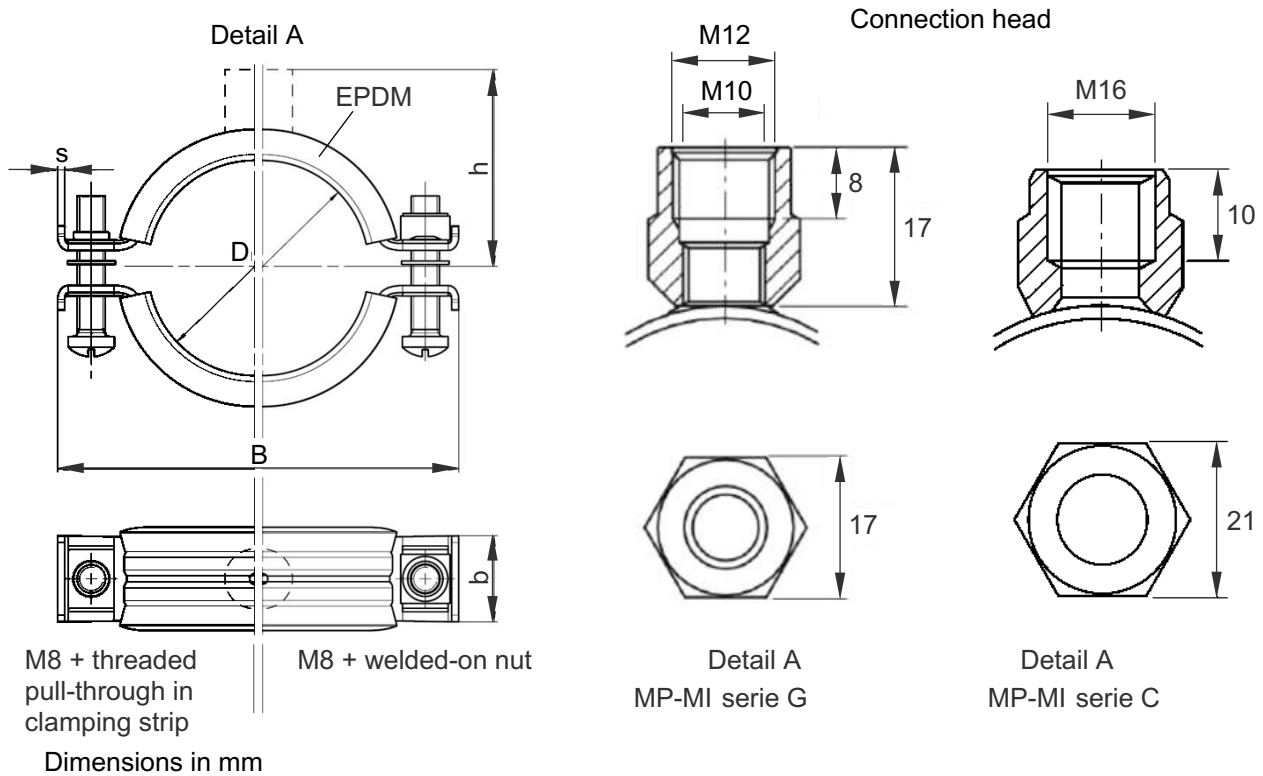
Geometry und dimensions of heavy-duty pipe rings MP-MI, serie G with connection head M10/M12, serie C with connection head M16
